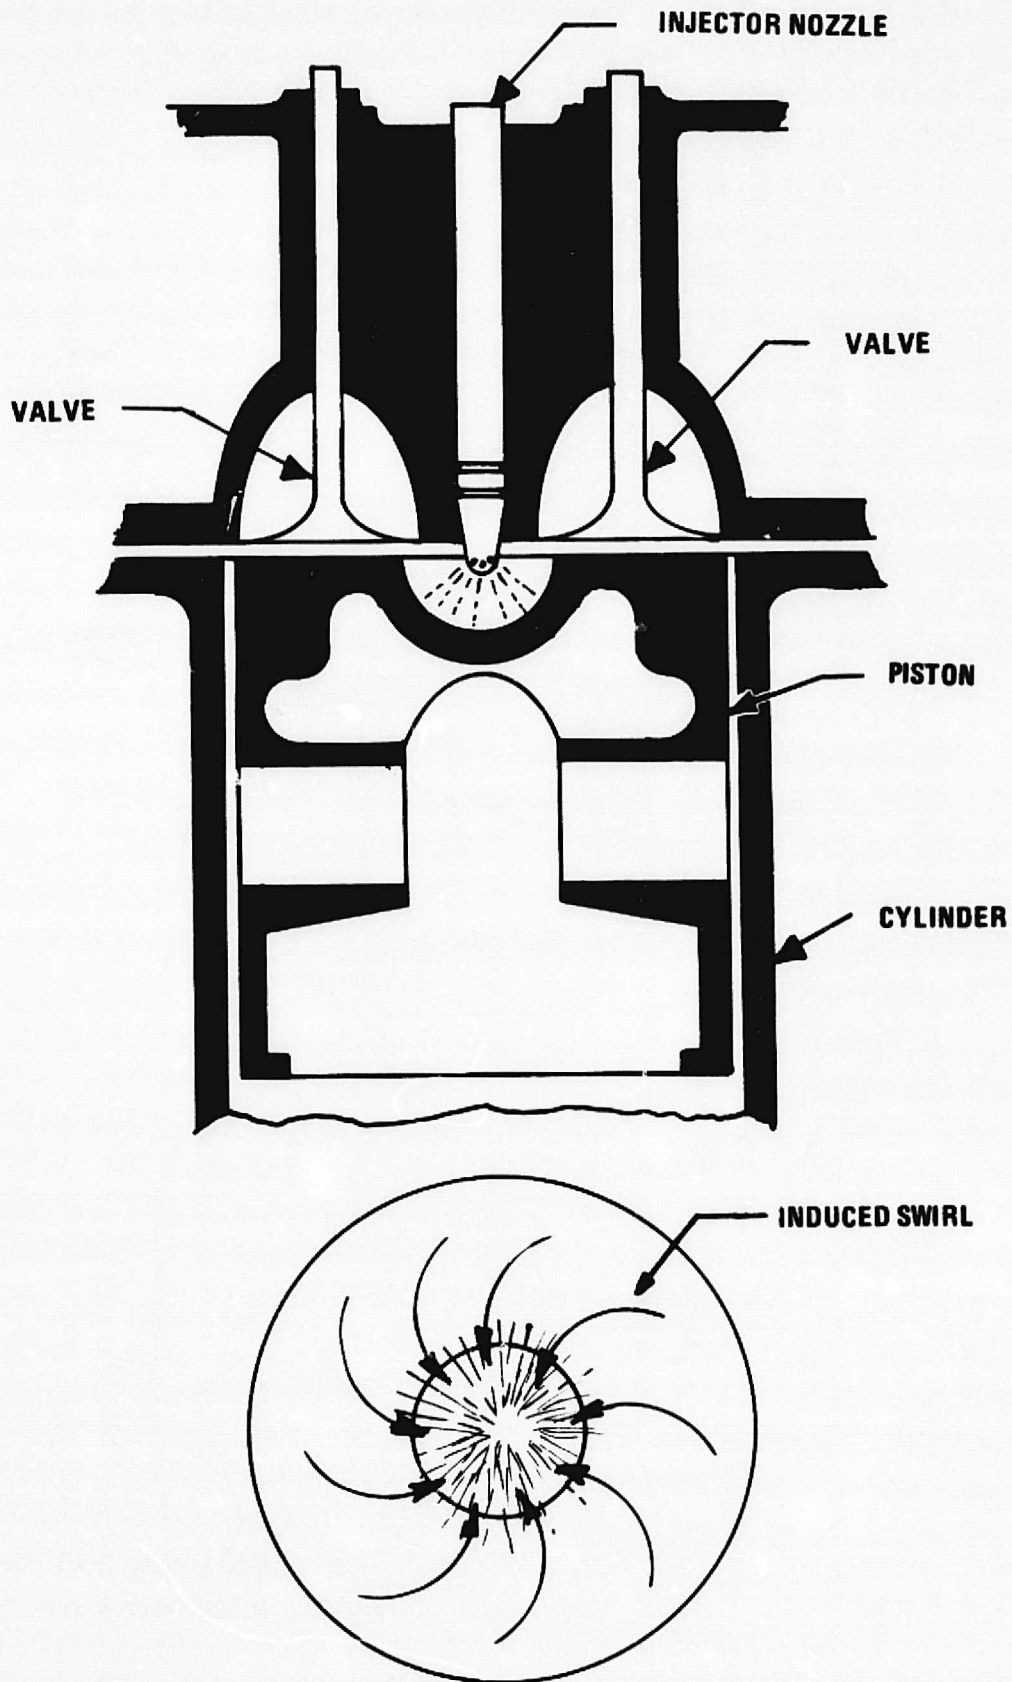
TYPICAL FOUR-STROKE DIESEL OPEN COMBUSTION CHAMBER
